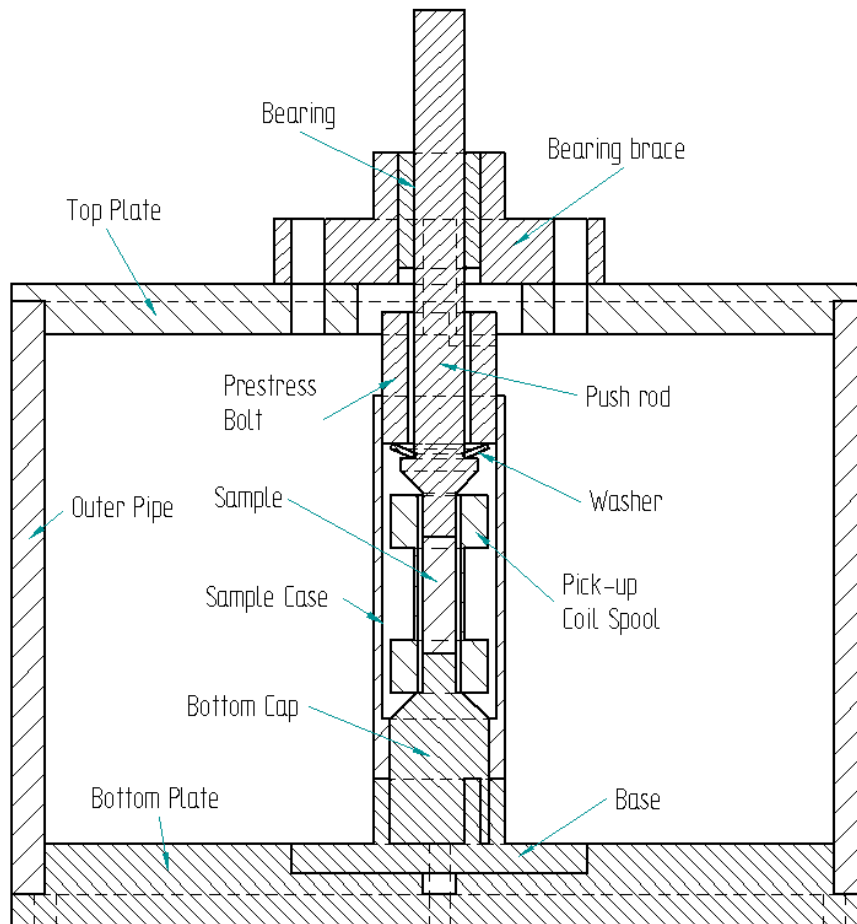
Cross-section of modified transducer assembly showing all relevant parts.
